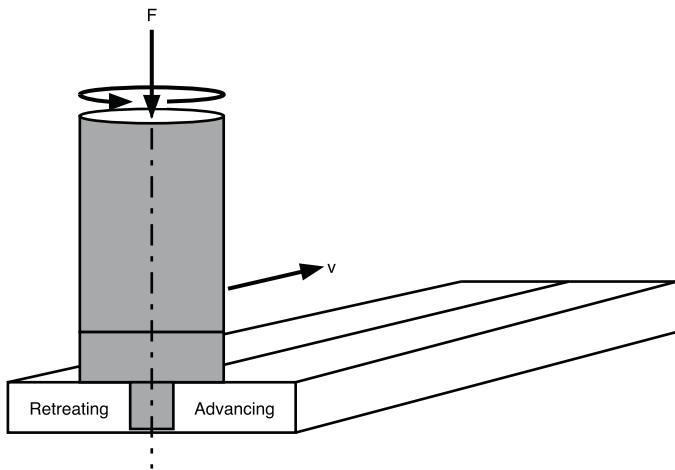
Schematic representation of the friction stir welding process showing advancing and retreating sides of the weld.
